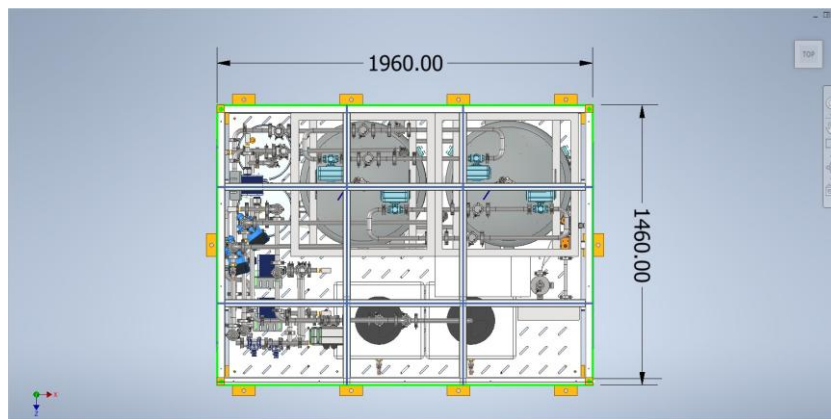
Top view of the rendering of one SDC prototype illustrating the external dimensions and the internal arrangement of the principal components.
